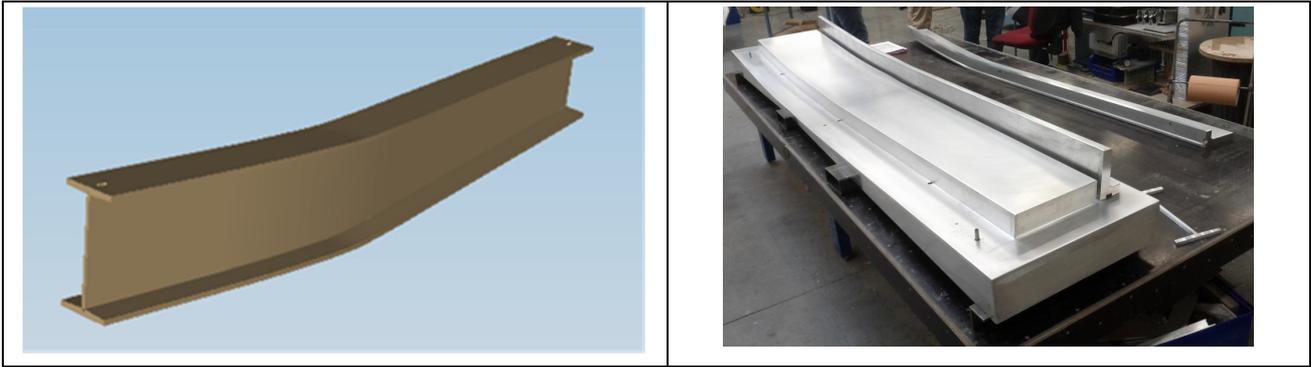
DAHER large scale demonstrator 3D CAD and tooling
